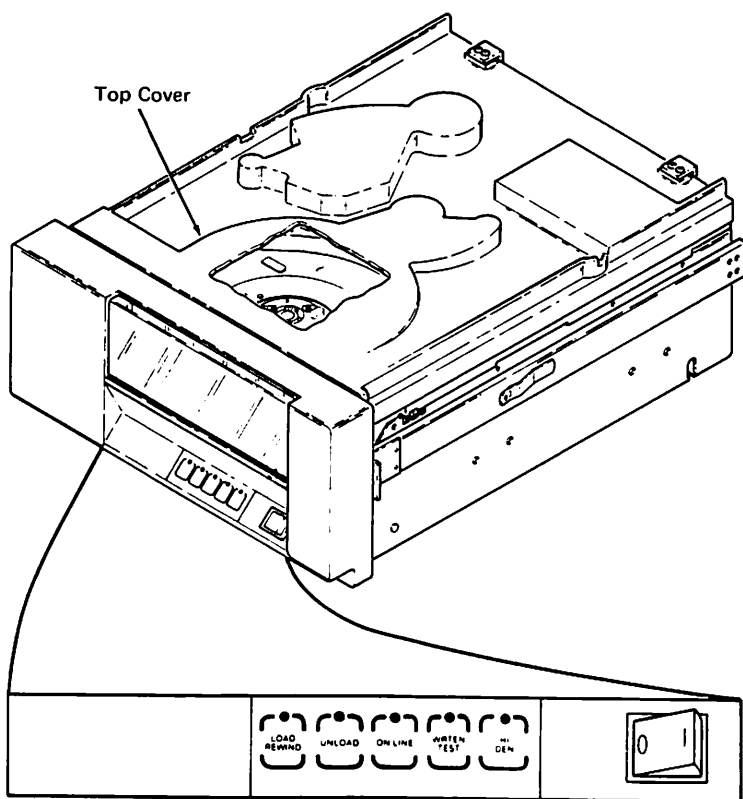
Reel Streaming Tape Drive from panel indicators and switches
